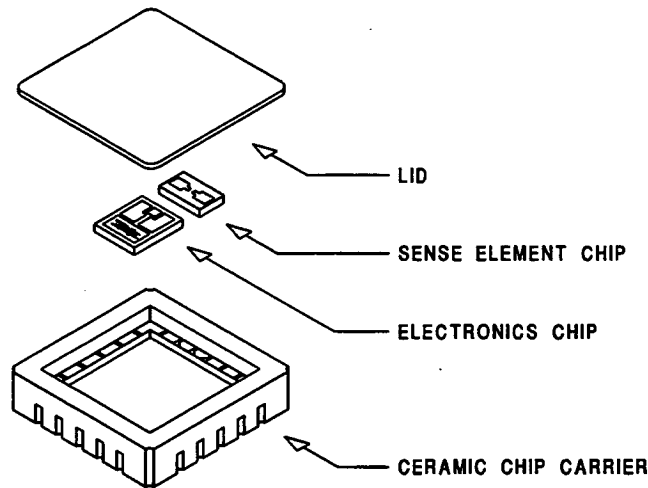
EXPLODED VIEW OF ACCELEROMETER MICROCIRCUIT ASSEMBLY
